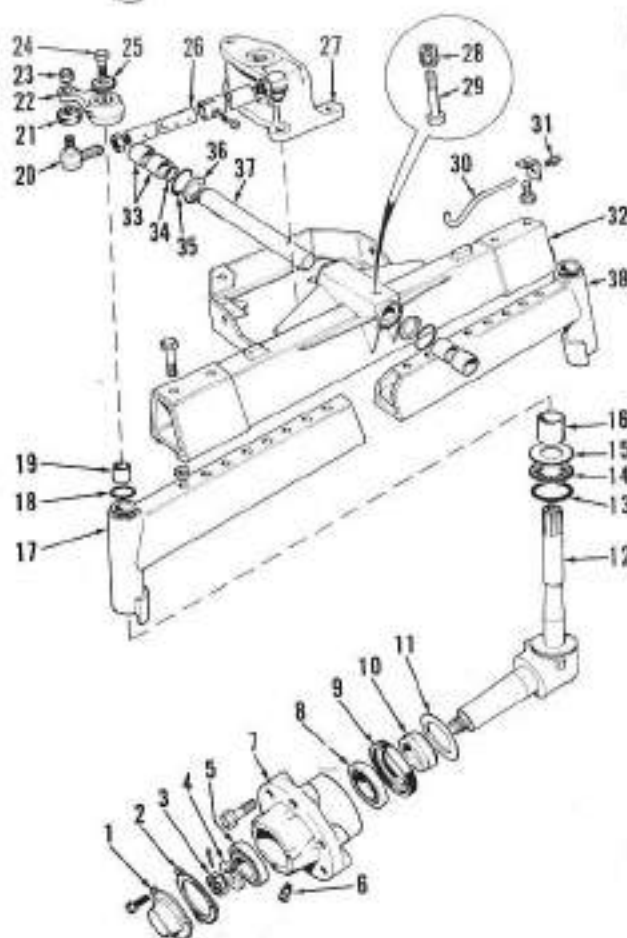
Exploded view of Models 1410 and 1412 front axle, wheel spindle, hub and bearing assembly. Seal (9) is installed with lip facing away from inner bearing.
